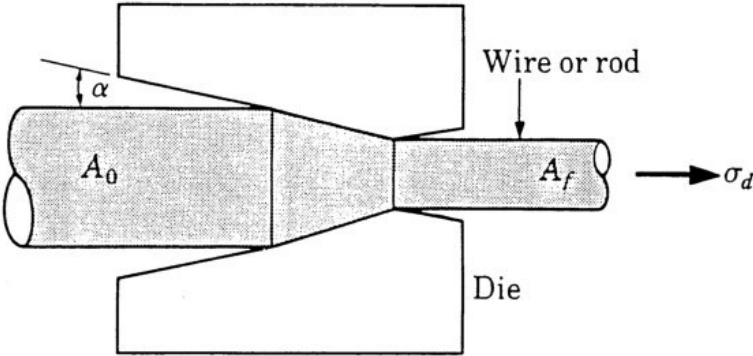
Schematic of wire drawing process [11, pp. 72-83]
